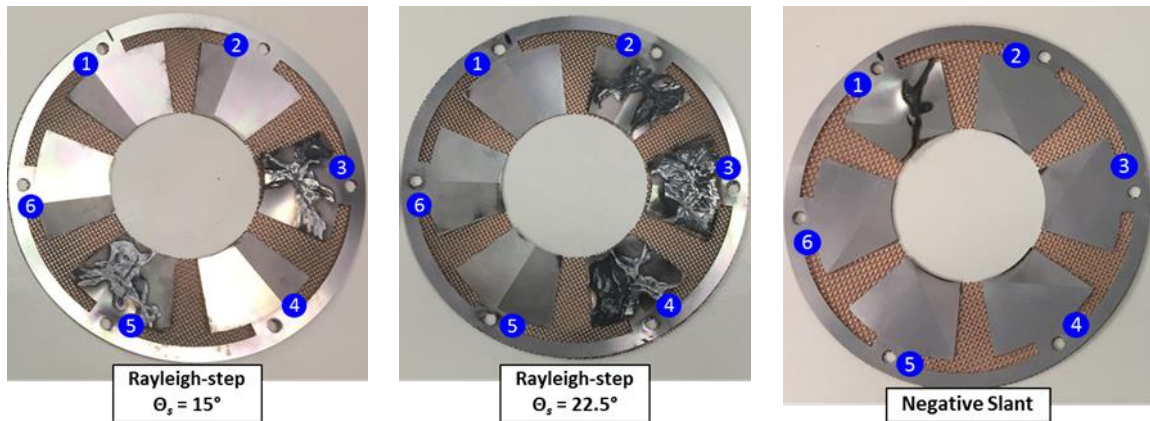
Photographs depicting post-test conditions of three Rayleigh-step top foils implemented on a prototype MMFTB.
